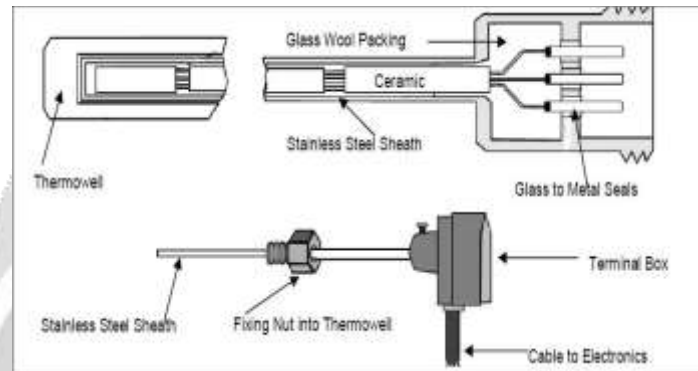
RTD element from shock and vibration. One common technique is to use a ceramic bobbin with a glass or epoxy seal over the coil and welded connections. An alternative to the wire-wound RTD is the thin-film element.
